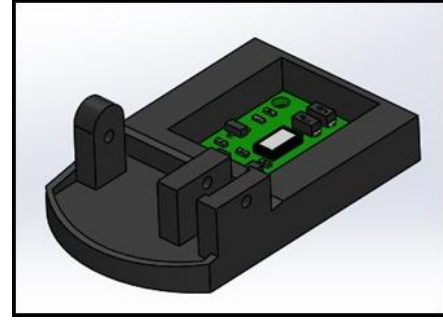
Isometric View of the Housing with the Max30100 Sensor
